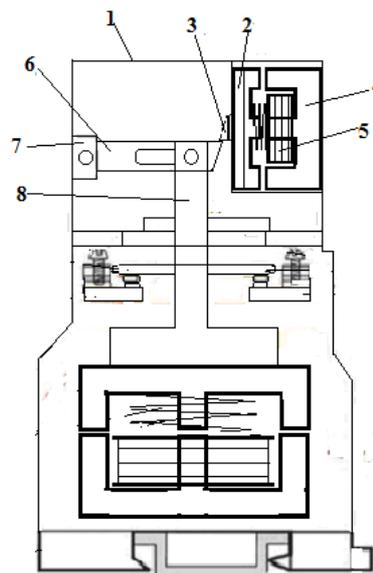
Designs of a magnetic starter with a direct-drive mechanism
